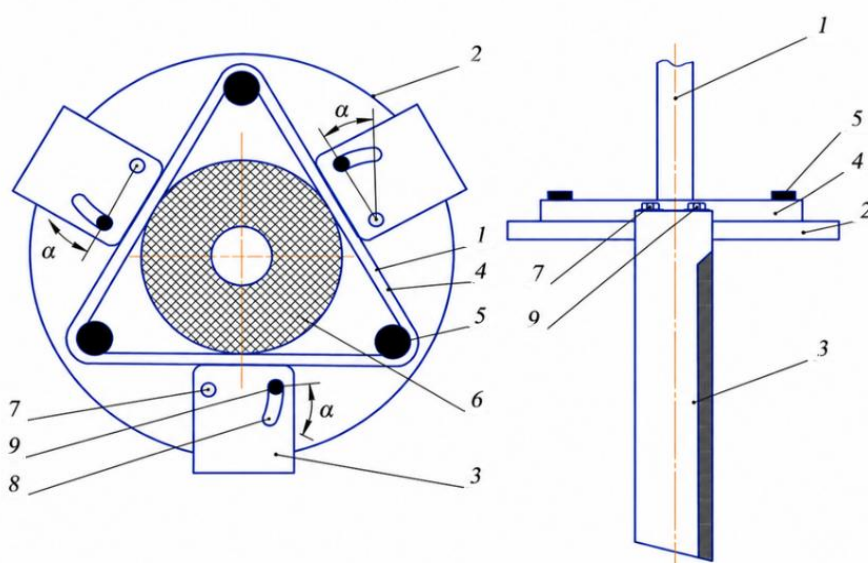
Vertical shaft rotary tiller with elastic blade support mechanism
